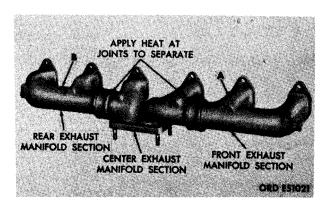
EXHAUST MANIFOLD ASSEM-BLY SHOWING HEAT APPLICATION POINTS FOR SEPARATION OF SECTIONS.
